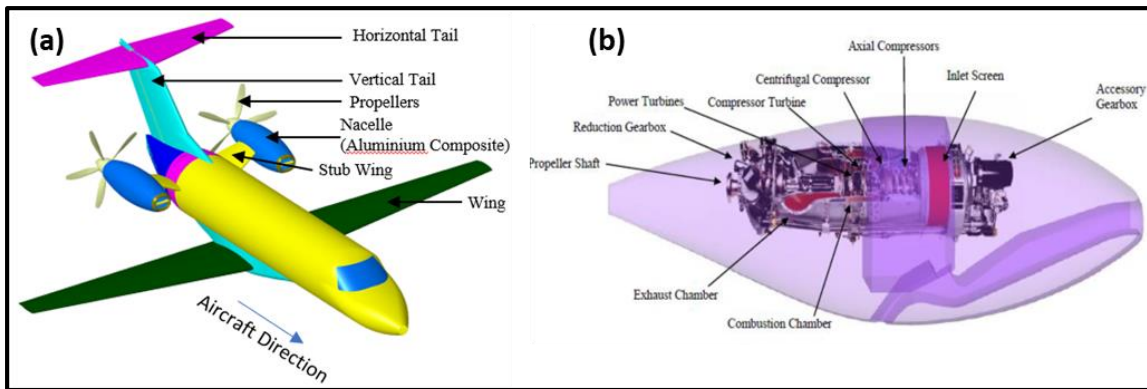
(a) Pusher-propeller aircraft overview (b) Engine components
